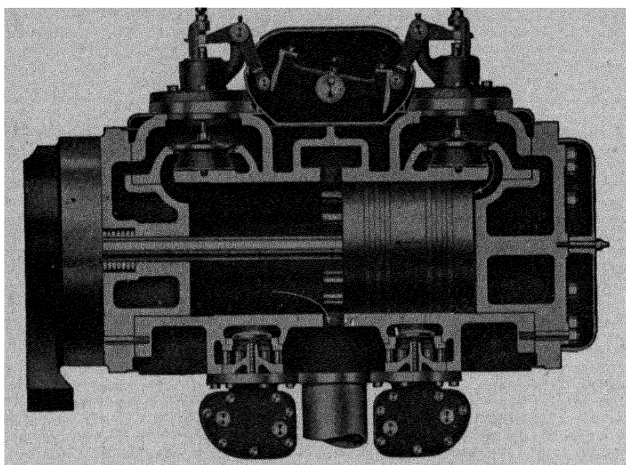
Cylinder and Valve Arrangement in Skinner Uniflow Engine
